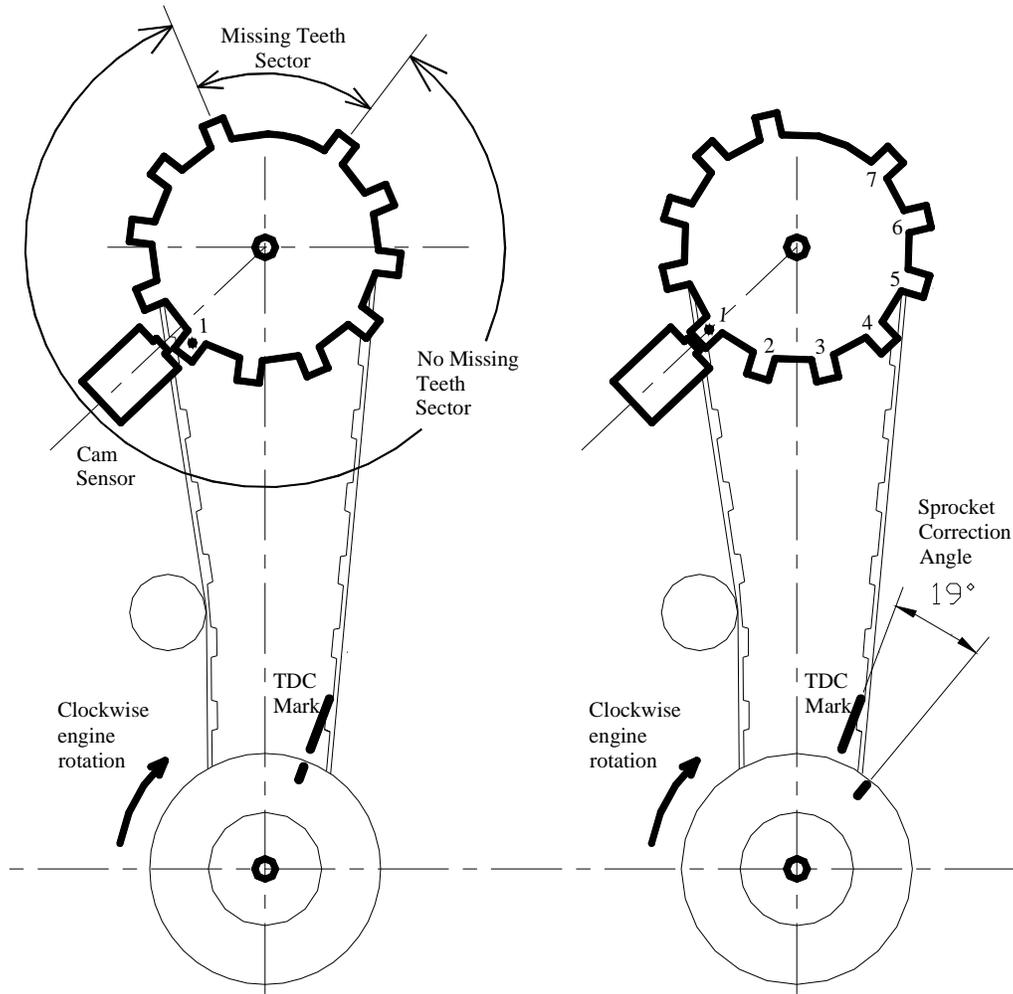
Case 3A, Determination of Sprocket Correction Angle and Last Non-Missing Tooth on Cam Sprocket
